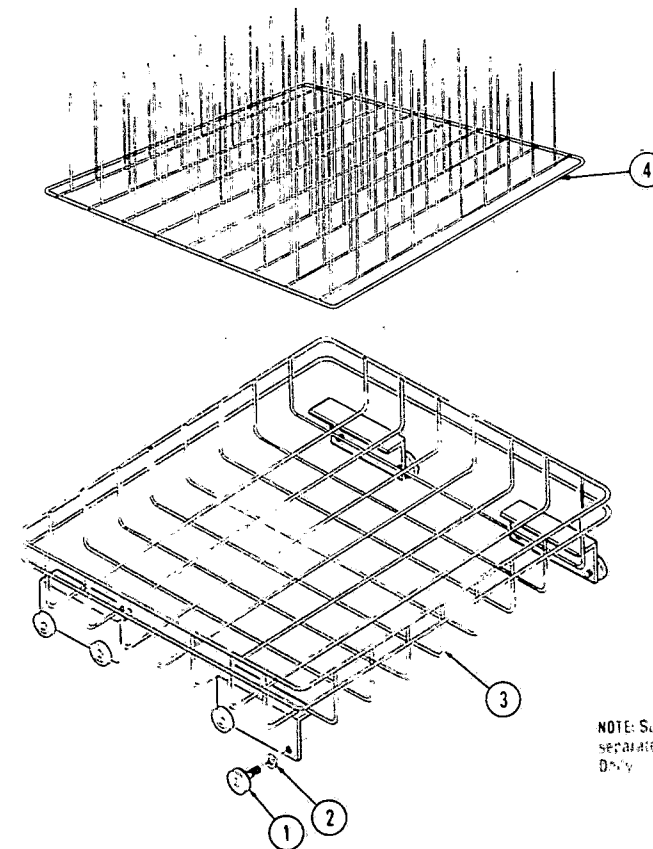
PIPETTE CLEANER ASSEMBLY.
